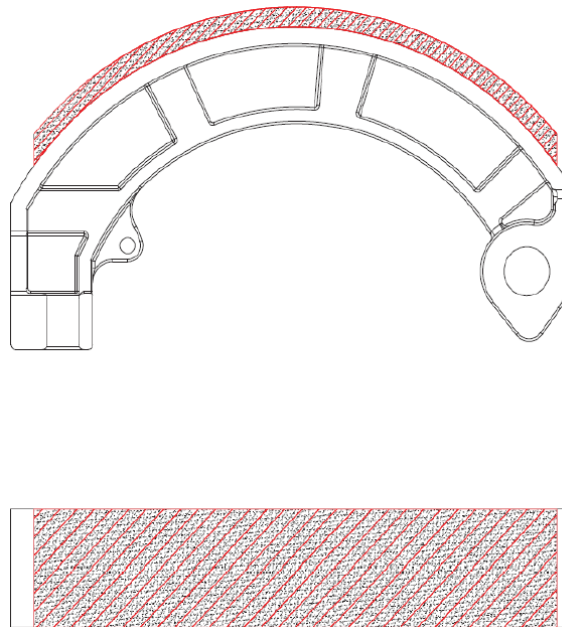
FRICTIONAL MATERIAL AREA OF DRUM BRAKE
